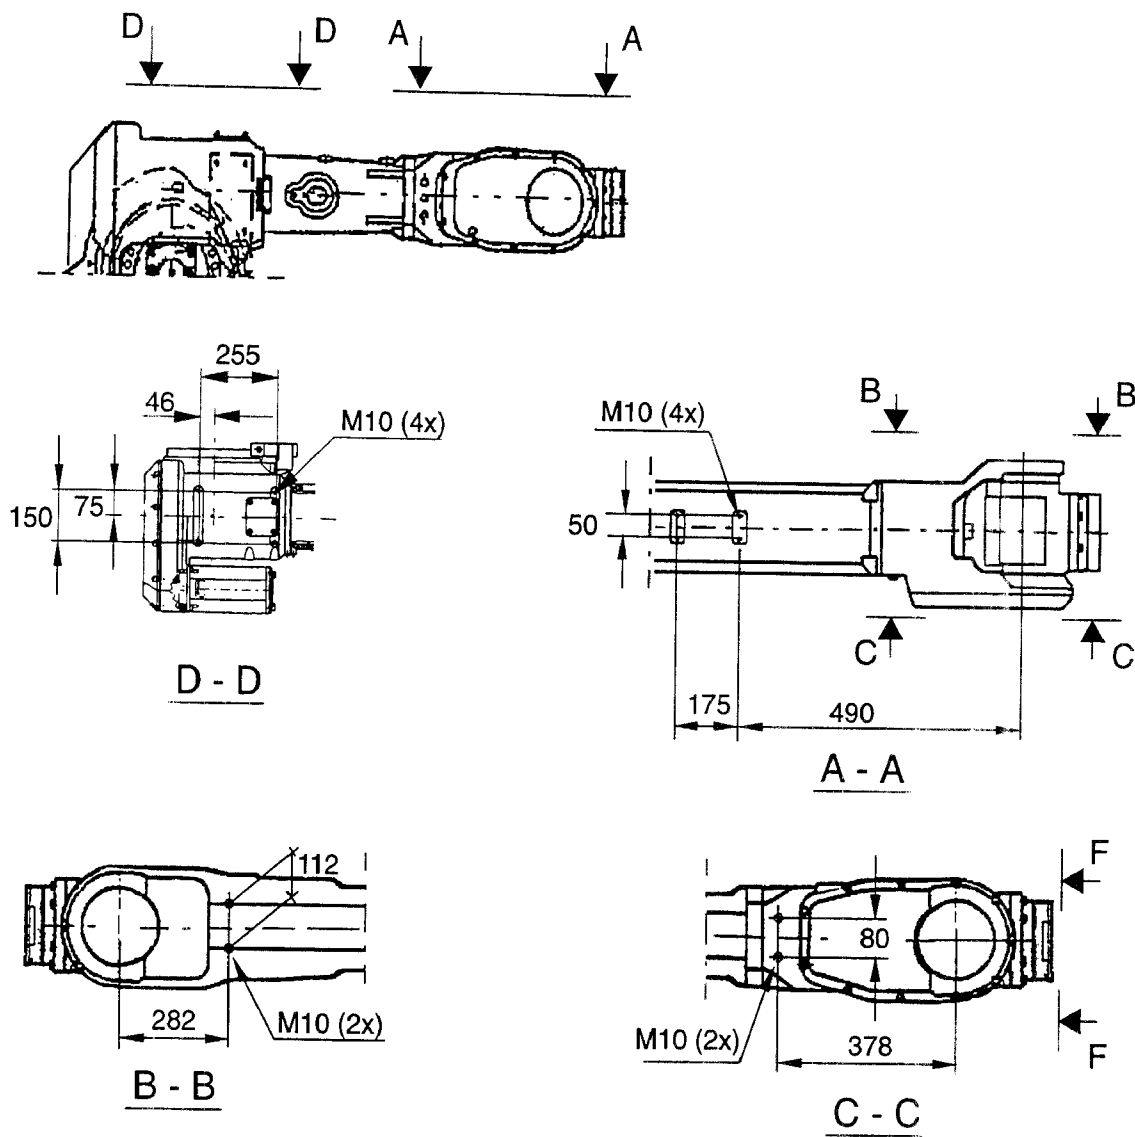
Holes for mounting of extra equipment IRB 6400C (dimensions in mm).
